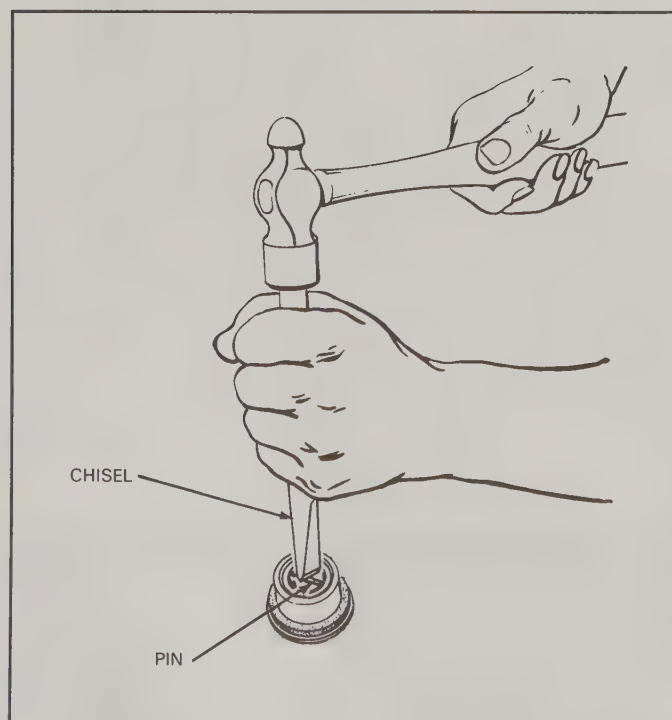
A cold chisel can be used to cut through bolts, pins, or other metal fasteners or parts.
